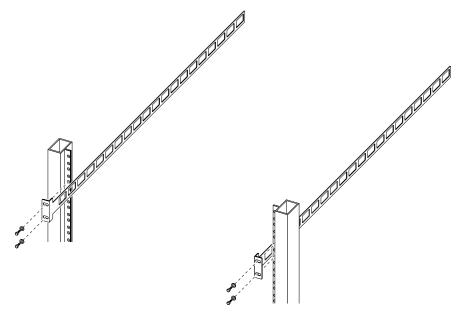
Attaching Rear Mounting Brackets—Four-Post Installation
